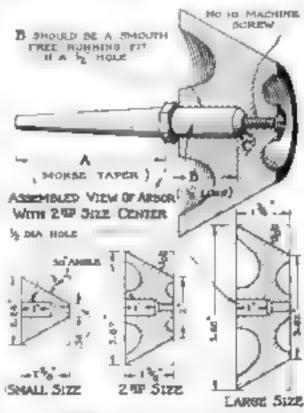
How the arbor and the three interchangeable come lathe centers are machined.
